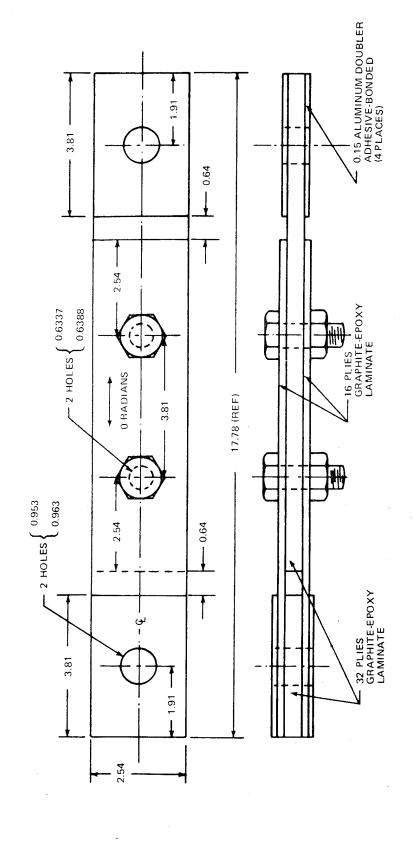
COMPRESSION BEARING TEST SPECIMEN AND FIXTURE
